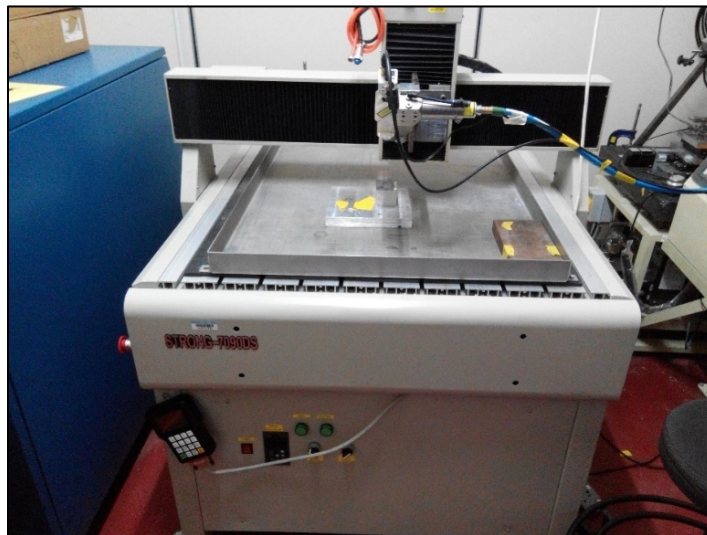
Nd: YAG JK300HPS laser machine using JK Luminator™ Process Tools: 40mm Right Angle Welder with 100 recoil.
